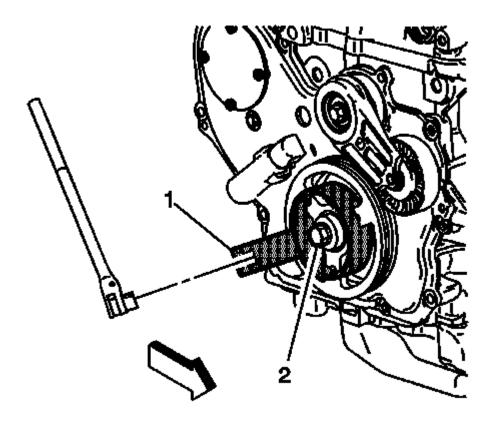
Crankshaft Balancer Bolt And Special Tool Courtesy of GENERAL MOTORS COMPANY
